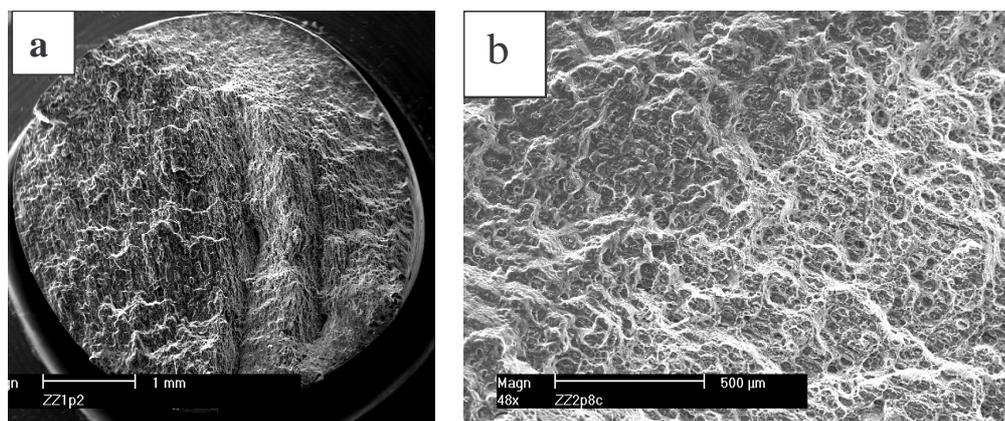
a) Fatigue fractures. The 5083 alloy welded by FSW method, tested in the air.
